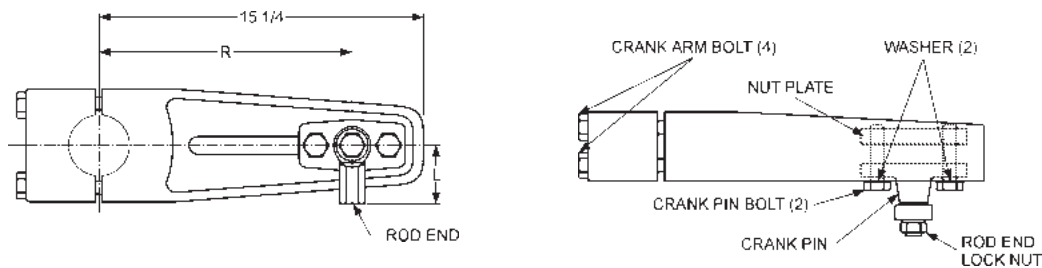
Model 11-400 Outline Dimension Drawings
